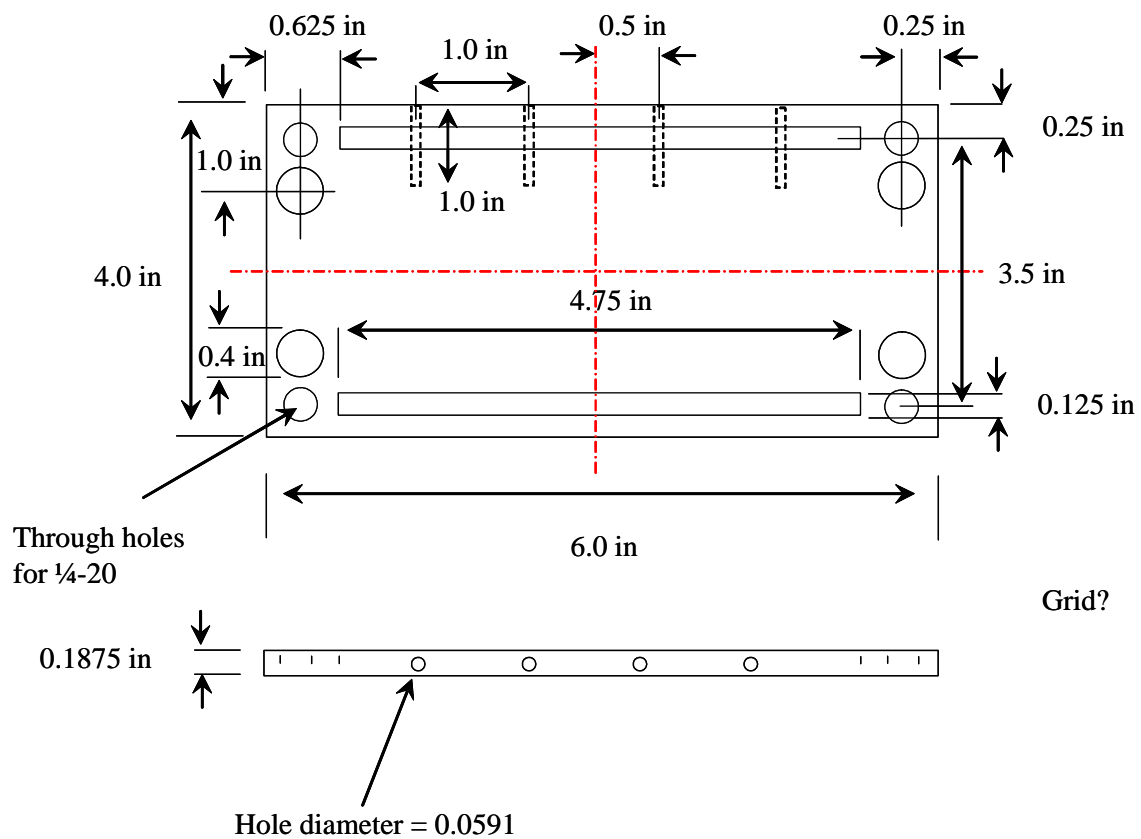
Technical drawings of an NCMC gradient hot stage with dimensions (4"x 6"x 3/16").
